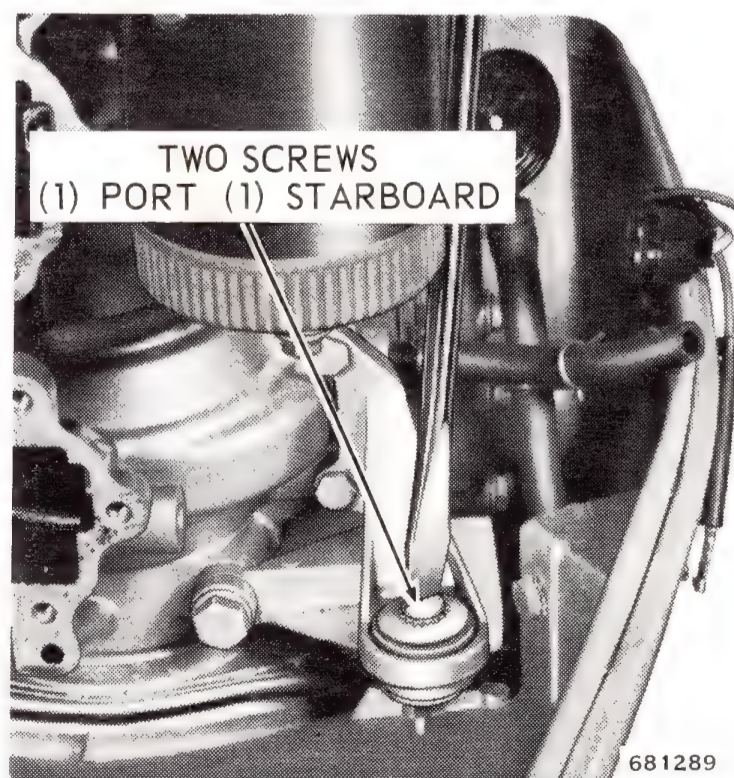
Power Head Bracket to Lower Motor Cover Screws
